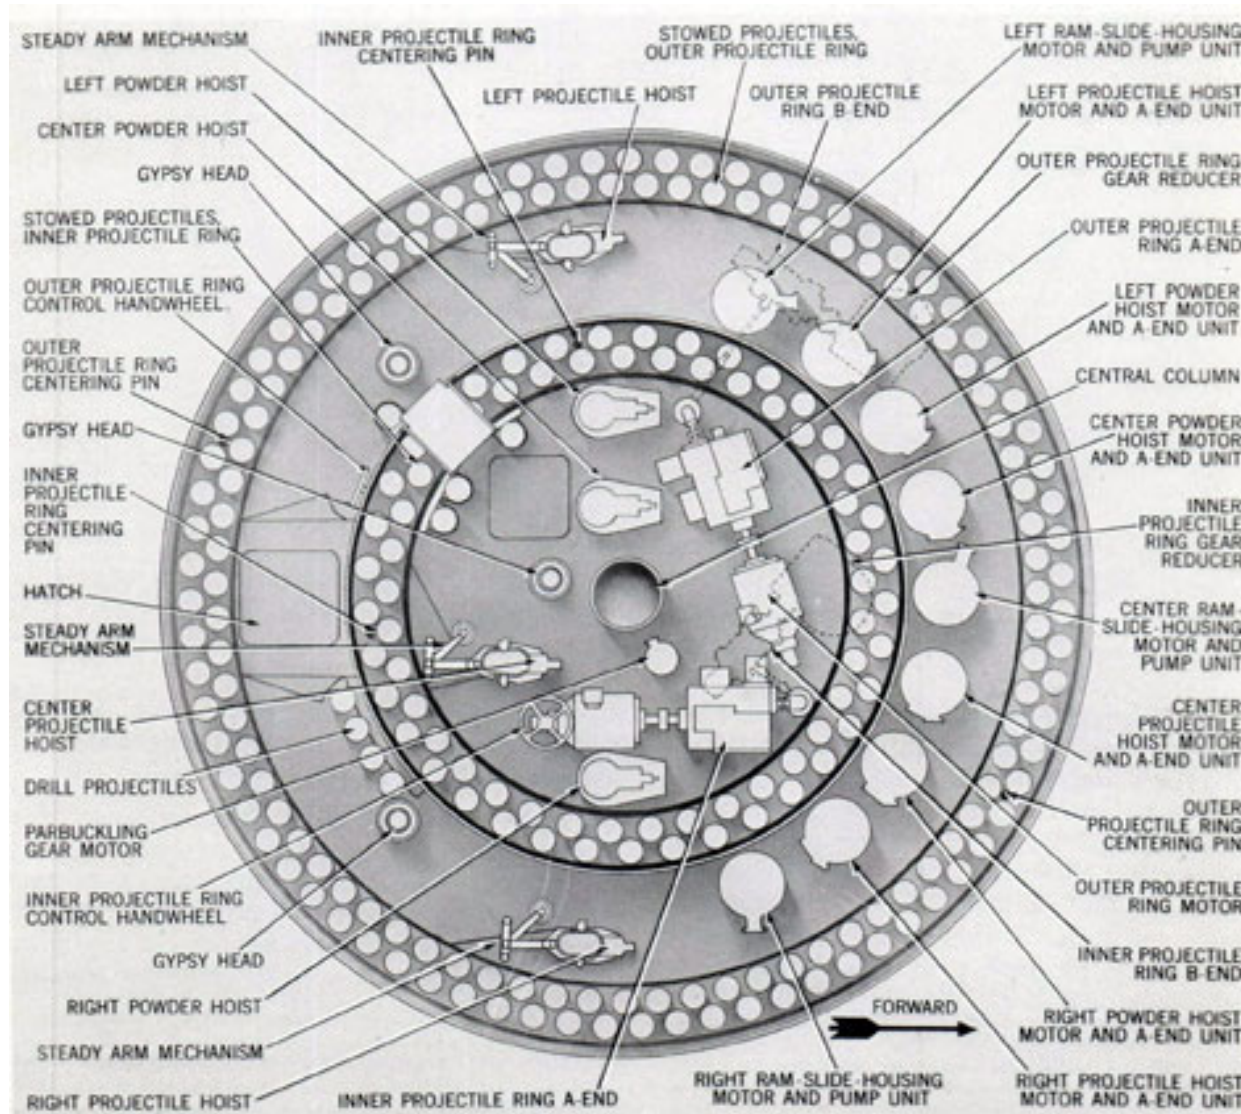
Ordnance Equipment on Upper Projectile Flat General Arrangement. Plan
